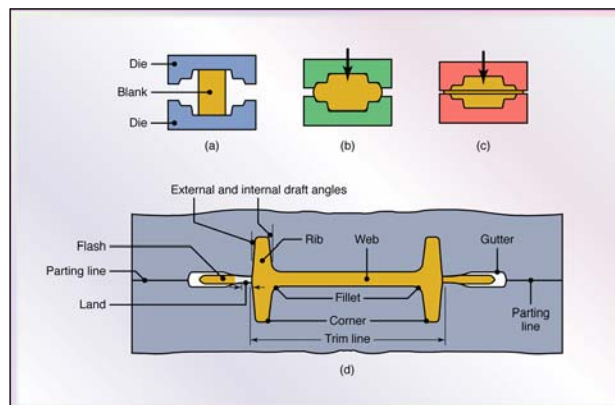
(a) through (c) Stages in impression-die forging of a solid round billet. Note the formation of Flash, which is excess metal that is subsequently trimmed off (see Fig. 14.7). (d) Standard terminology for various features of a forging die.
